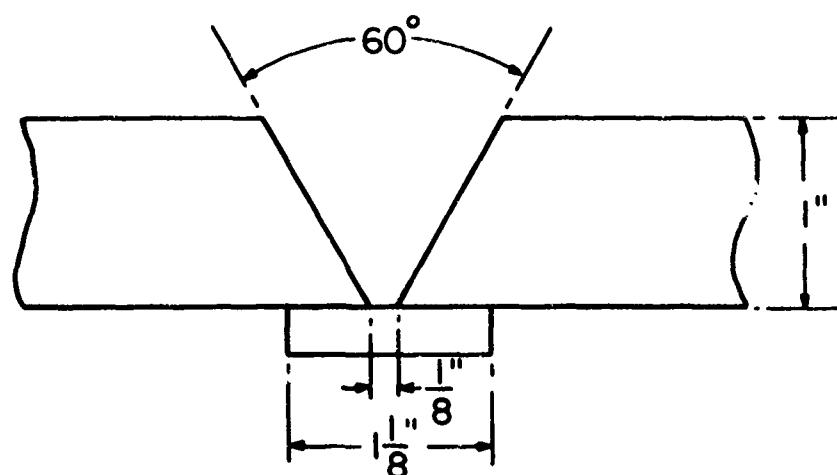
Suitable joint geometries for weld metal 5/8 DT specimens
